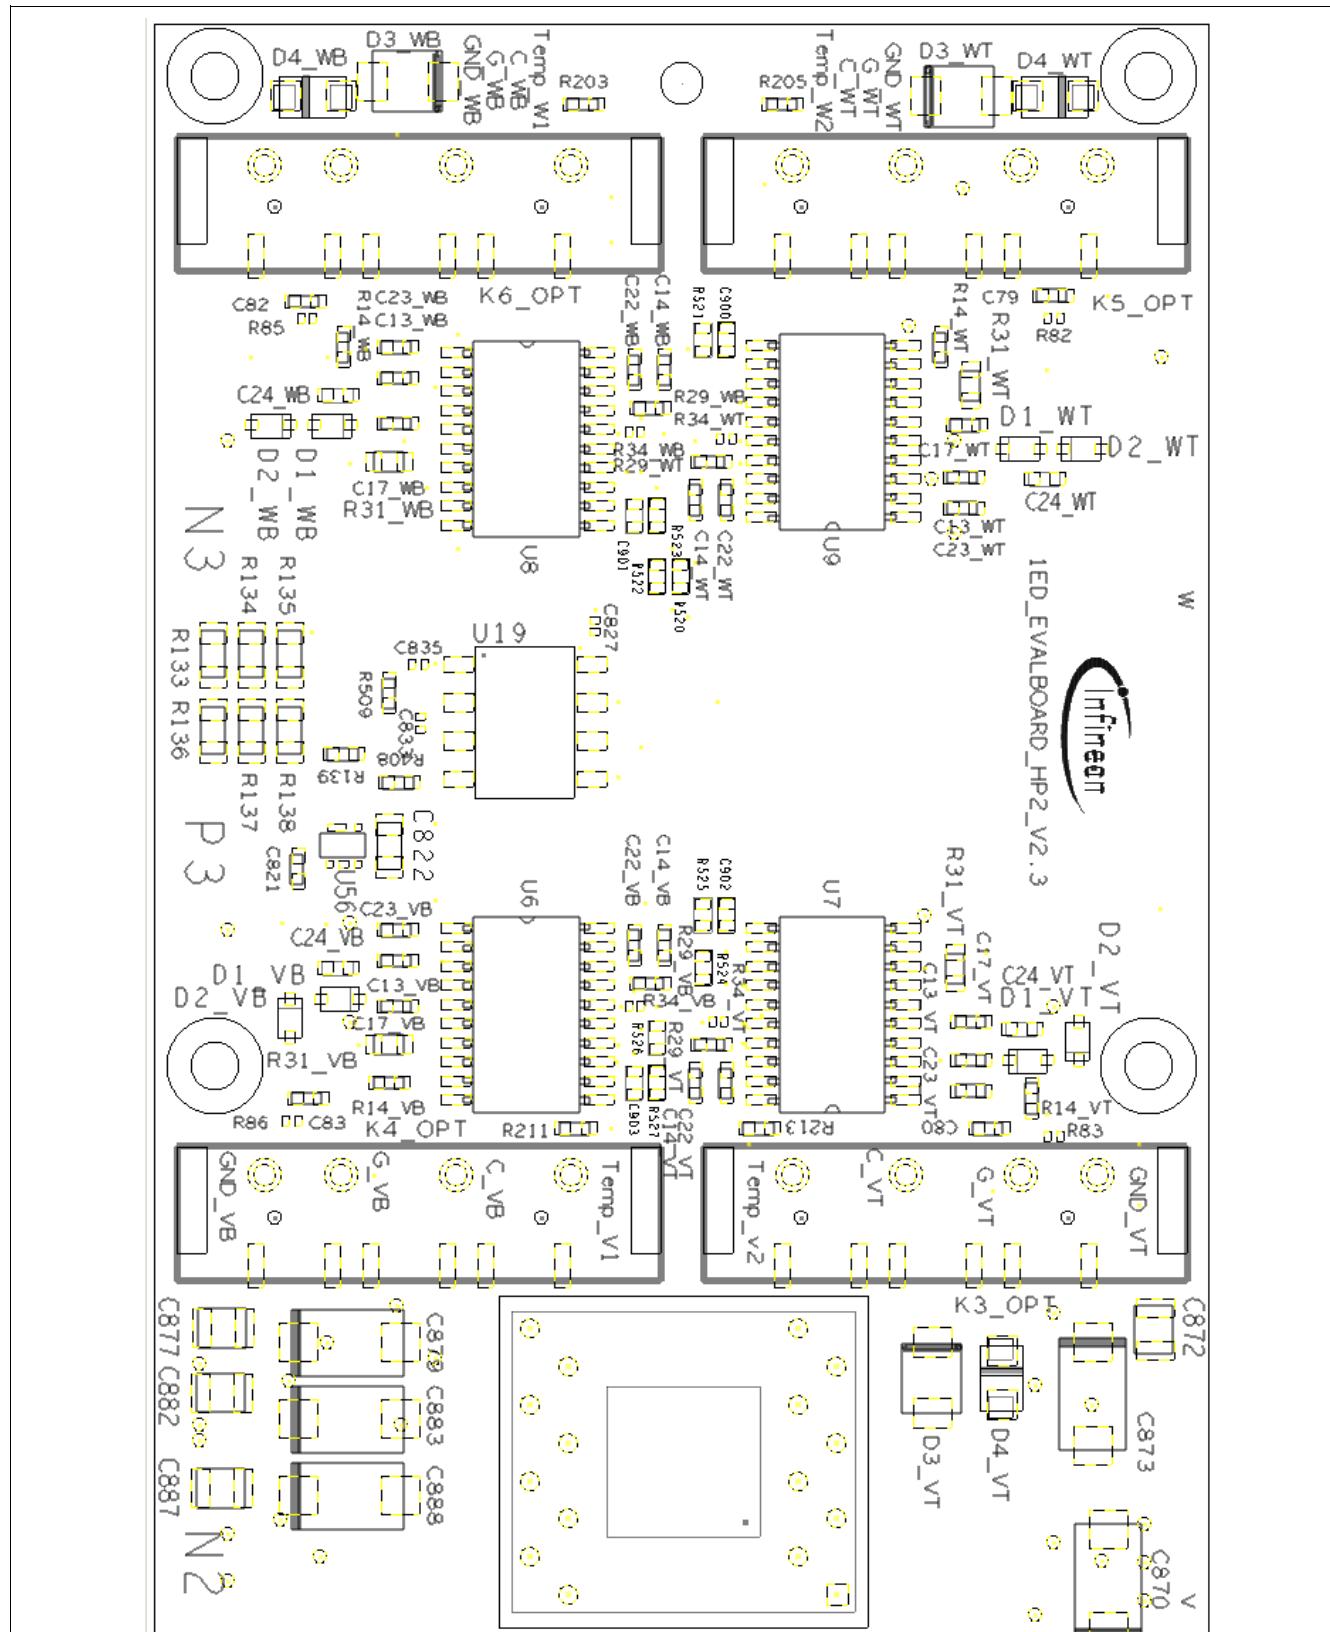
Assembly Drawing of the Driver Board (Top) - part 1
